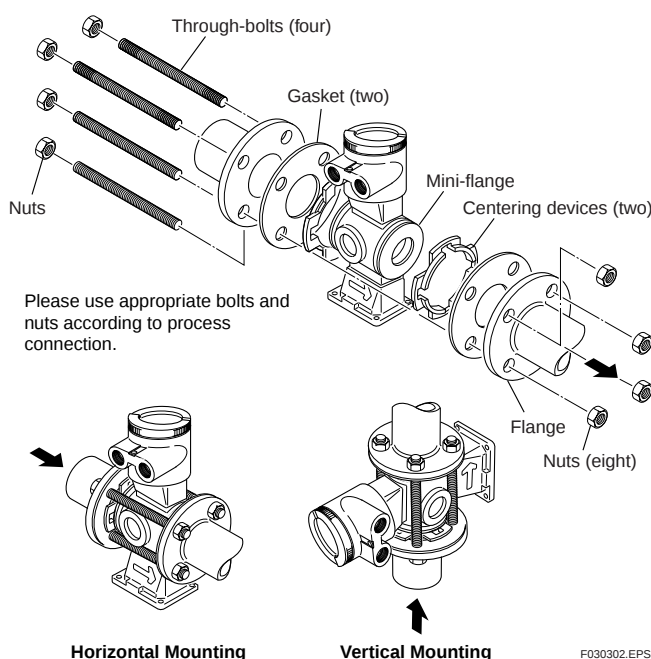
Mounting Procedure (Size: 2.5 mm(0.1in.) to 15 mm(0.5in.))
